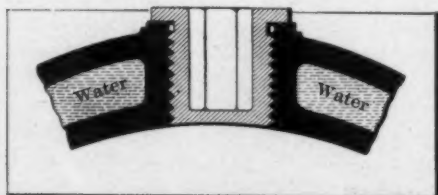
More perfect design with enough thread on plug to abort stripping.
